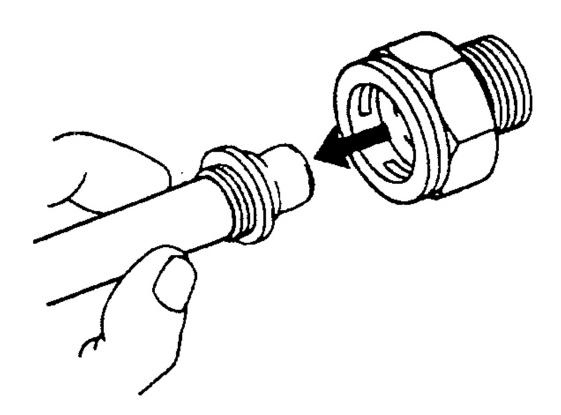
Cooler Line & Quick Connect Fitting Courtesy of GENERAL MOTORS CORP.
